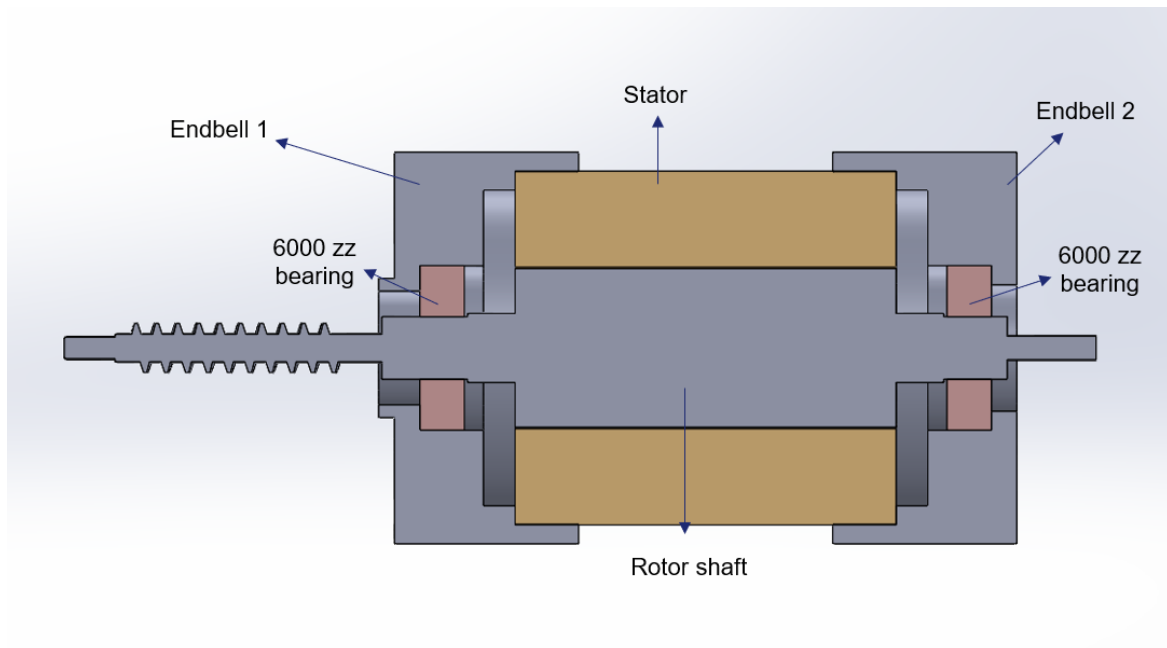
SRM motor assembly depicting worm machined on the motor shaft
